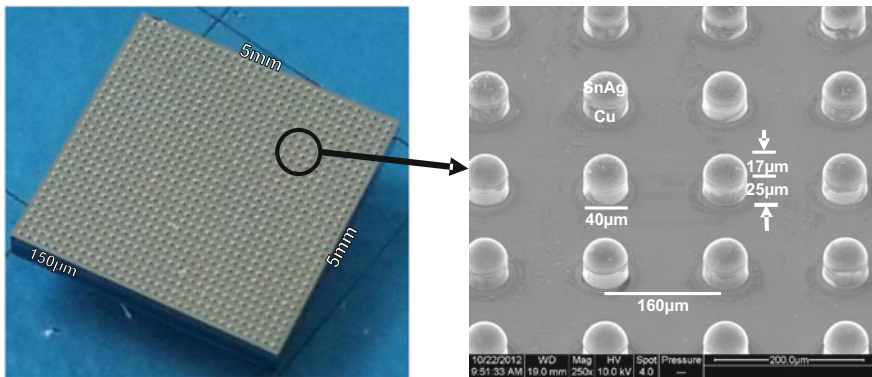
Test chip with Cu pillar + SnAg solder cap
